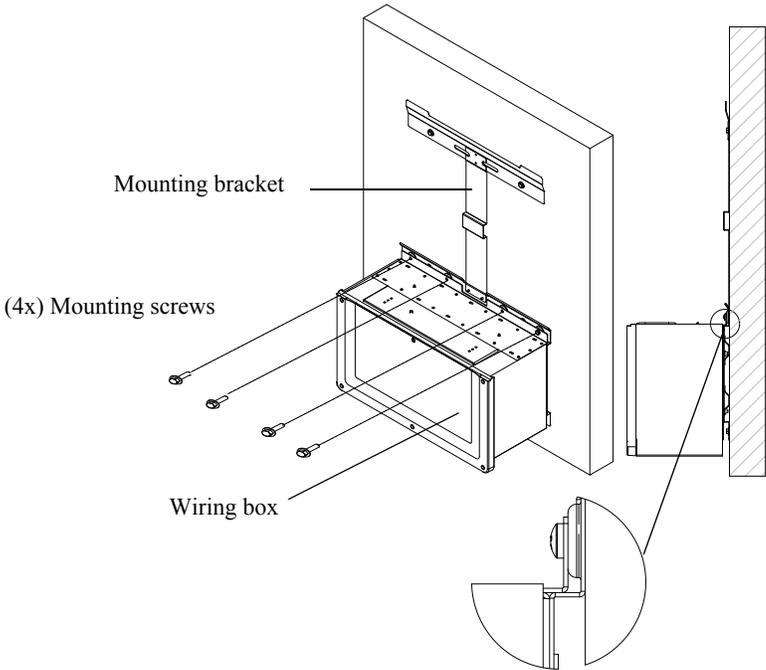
Fastening the wiring box to the mounting bracket
